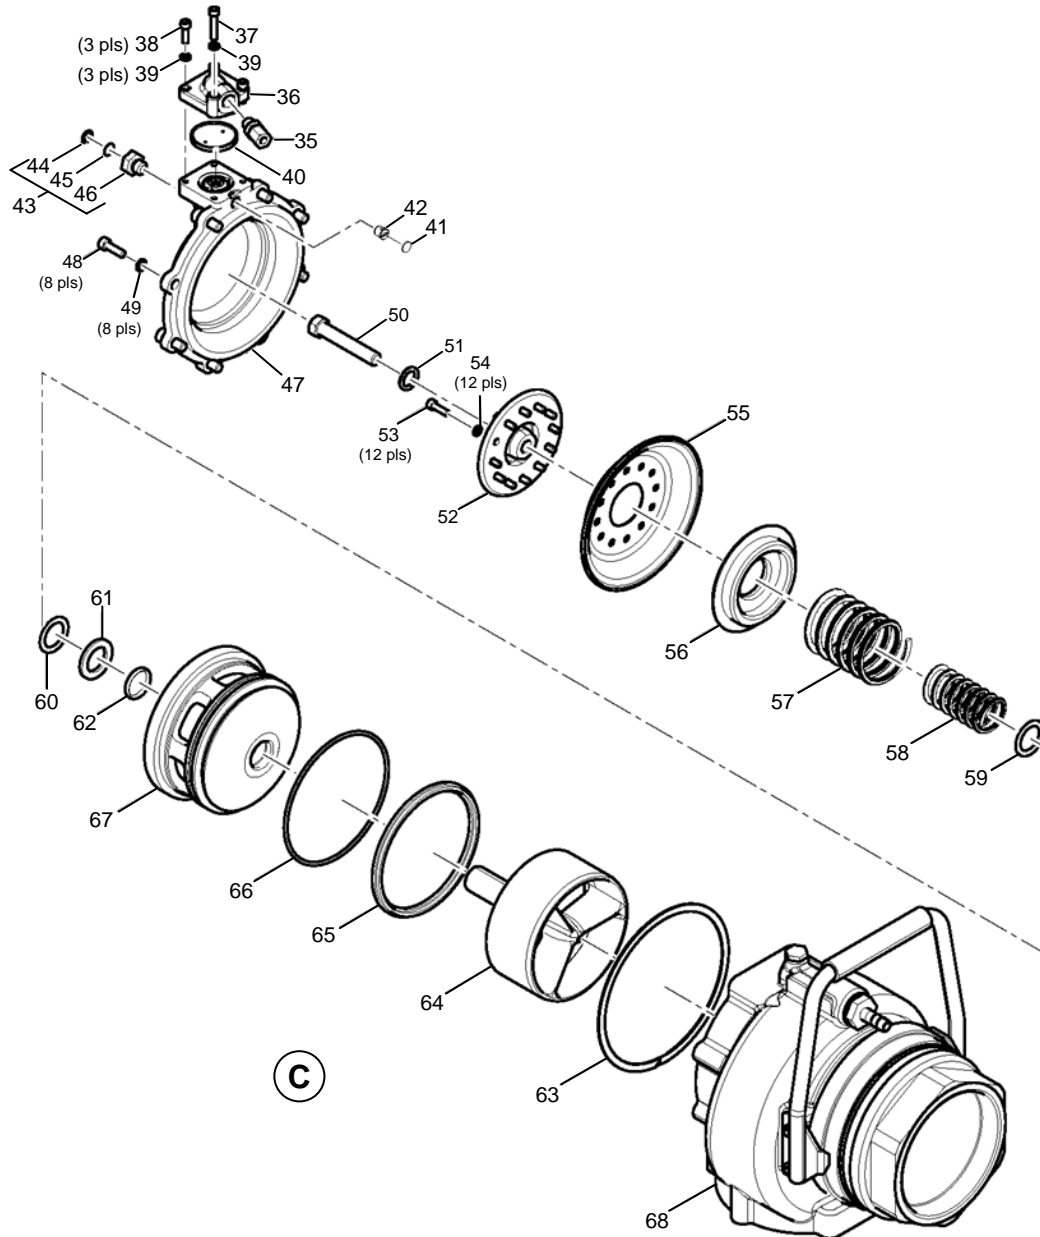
Valve Assembly, Pressure Control, 4 Inch Intake
